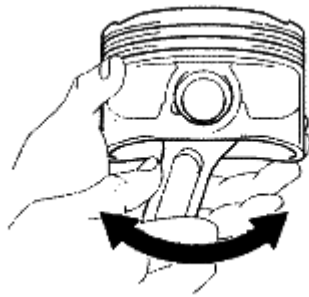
Locating Fitting Condition Between Piston And Piston Pin
